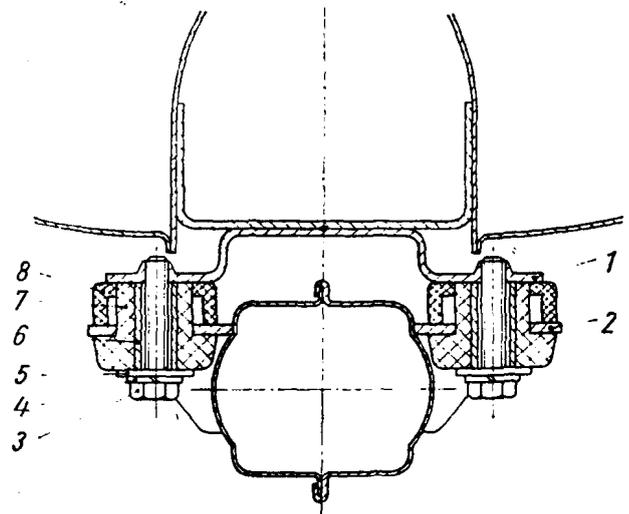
Rear mounting of the fuel tank at the frame (TS 125 and 150)
